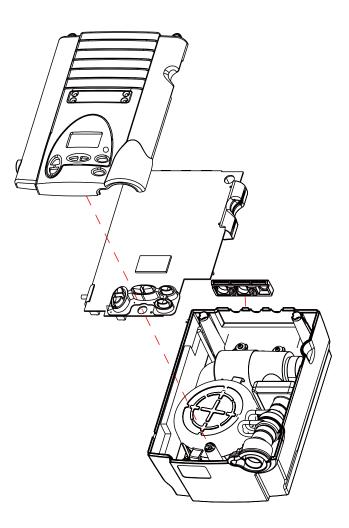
FIGURE C: REMOVAL AND INSTALLATION OF THE TOP ENCLOSURE
